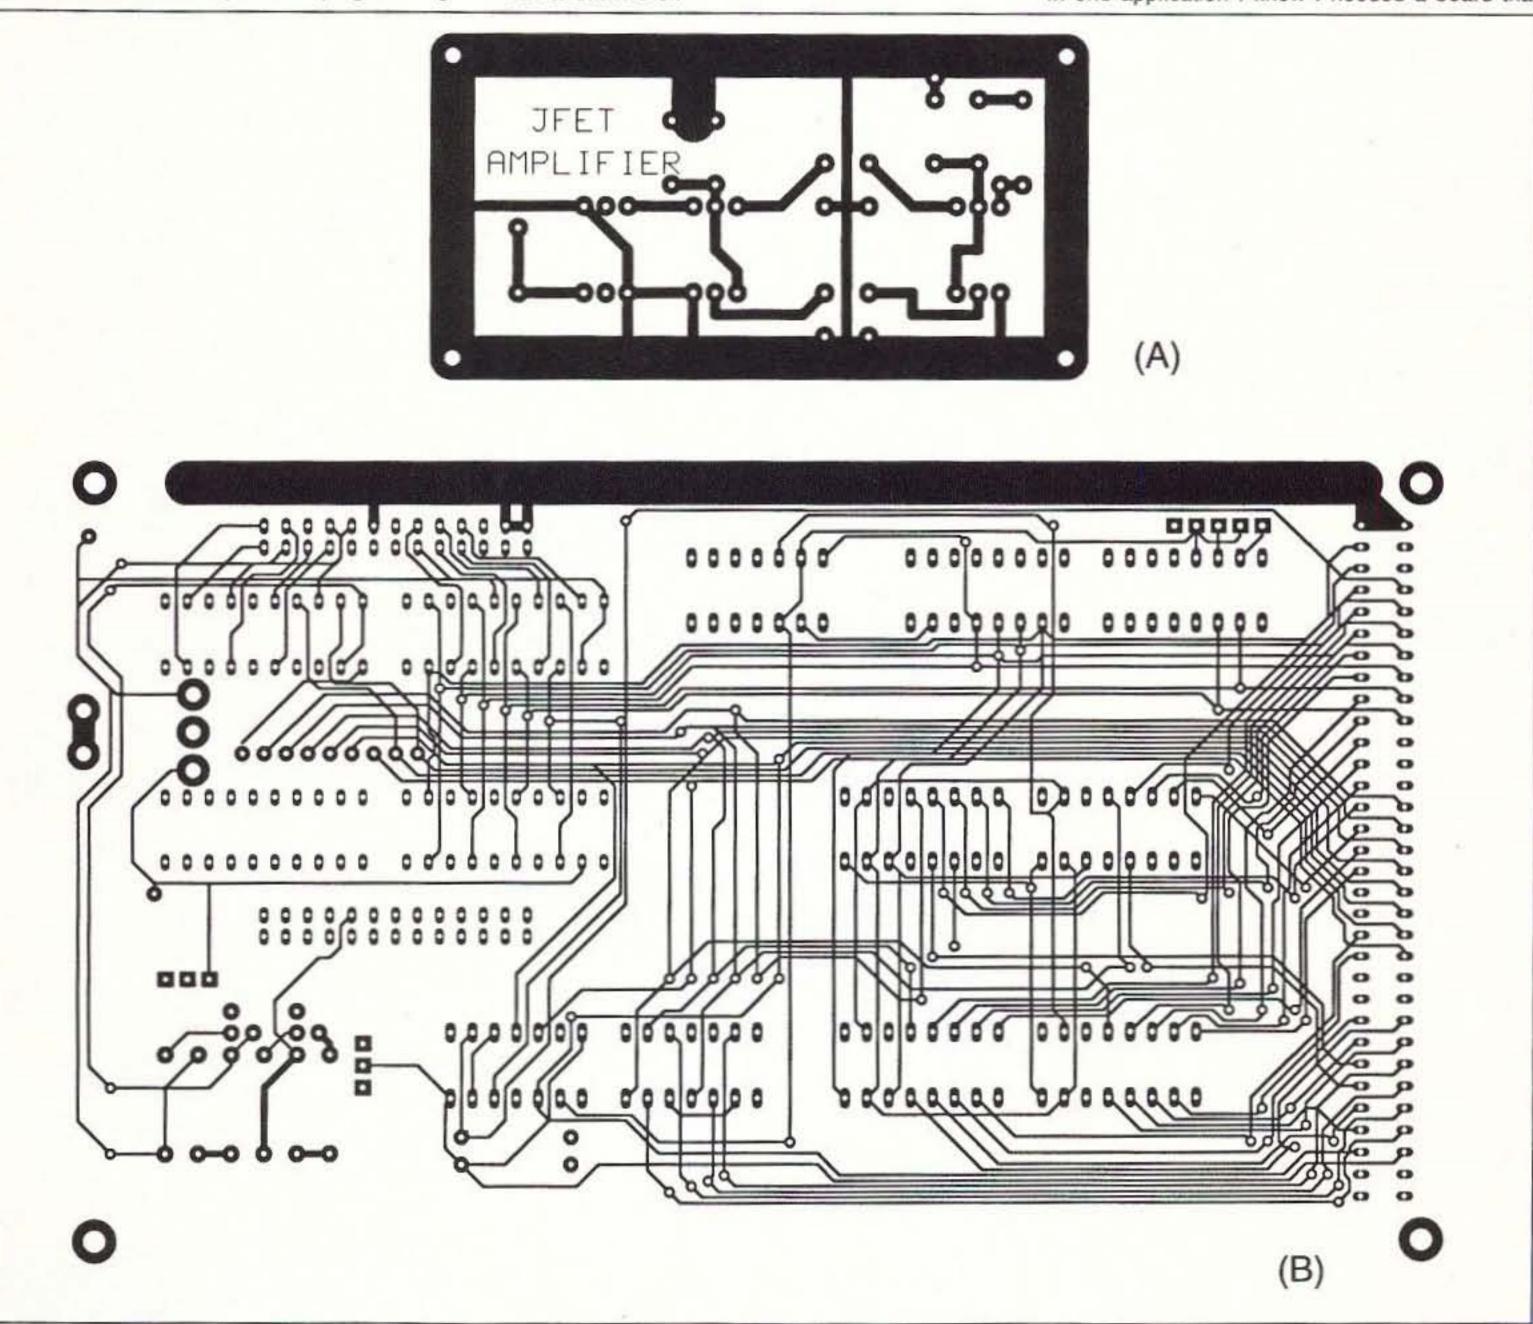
A) JFET preamplifier PCB I designed; B) Complex board from the tutorial package of EASY-PC.
